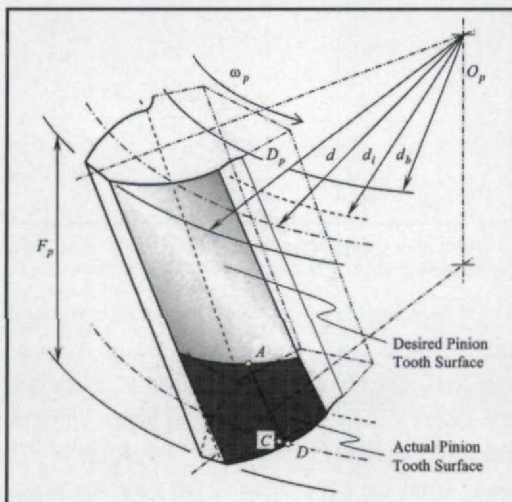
Deviation of an actual gear tooth surface from the desired gear tooth surface caused by lack of the hob idle distance.
